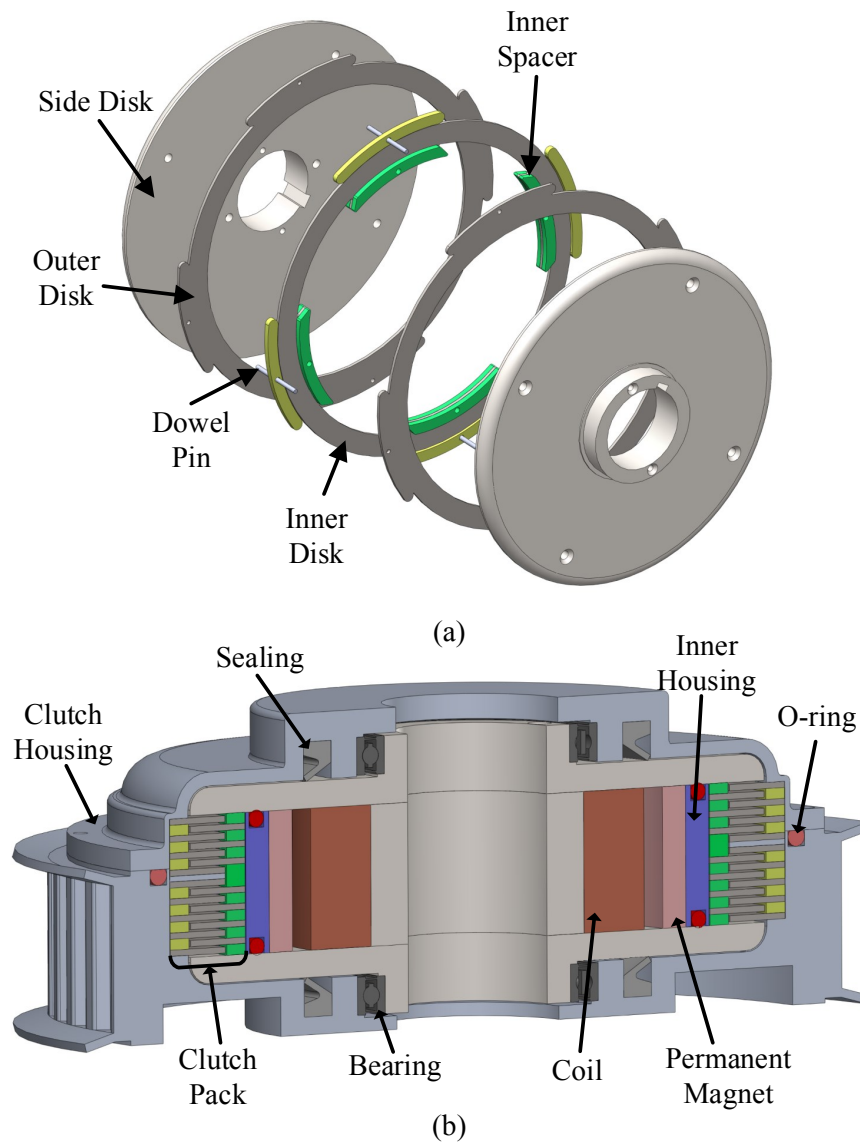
(a) Inner assembly of the clutch pack, (b) assembly of the HMR clutch.
